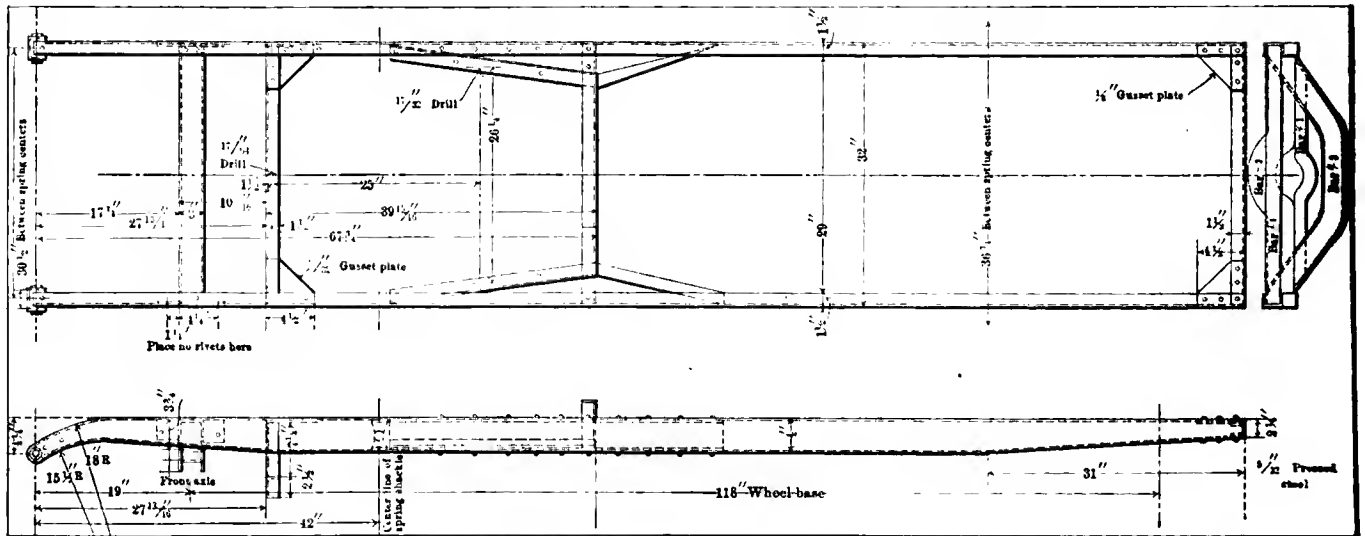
Inter-State frame in plan and elevation, with four cross members, and side bars straight in front and rear
